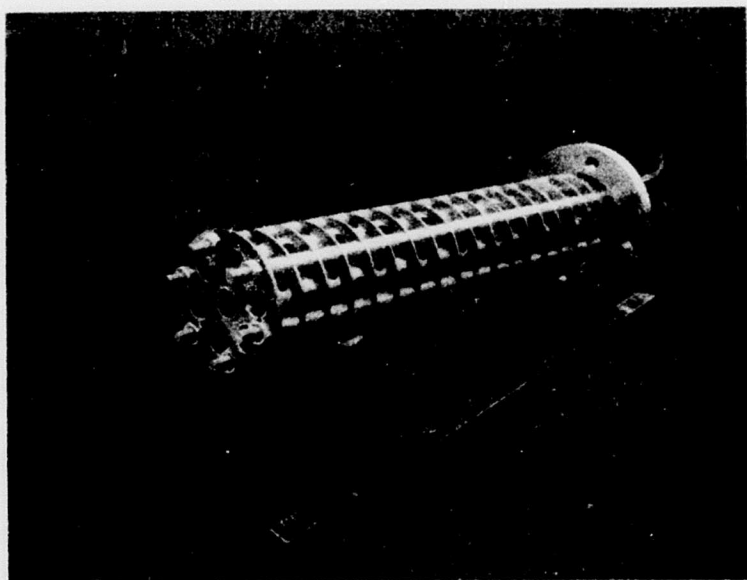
Multitube Suppressor Assembly for Shock Tube Tests (Outer housing is removed to show perforated tubes and baffle construction.)
